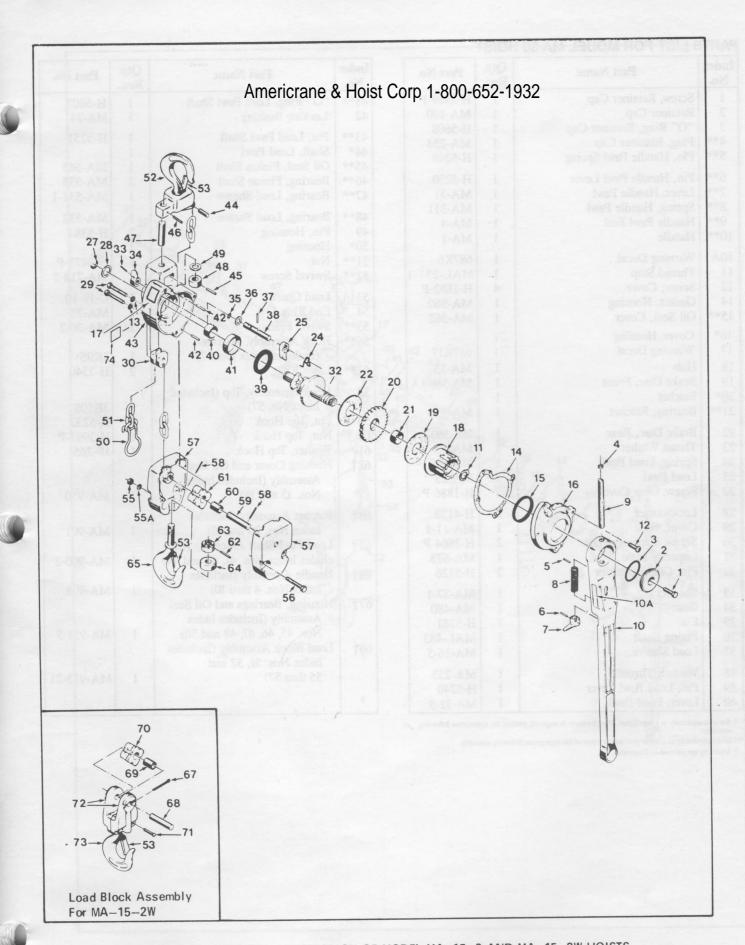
EXPLODED LLUSTRATION OF MODEL MA-15-2 AND MA-15-2W HOISTS
